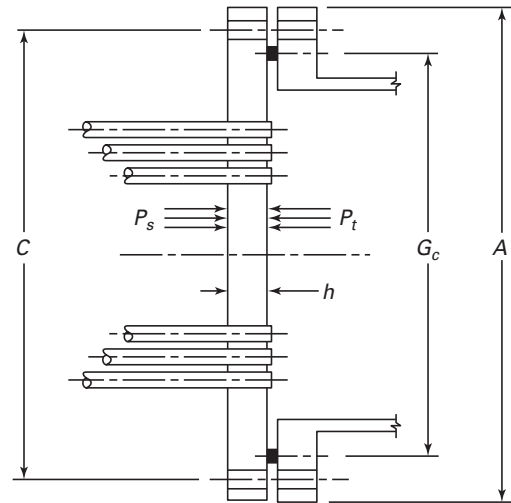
FLOATING TUBESHEET HEAT EXCHANGERS
